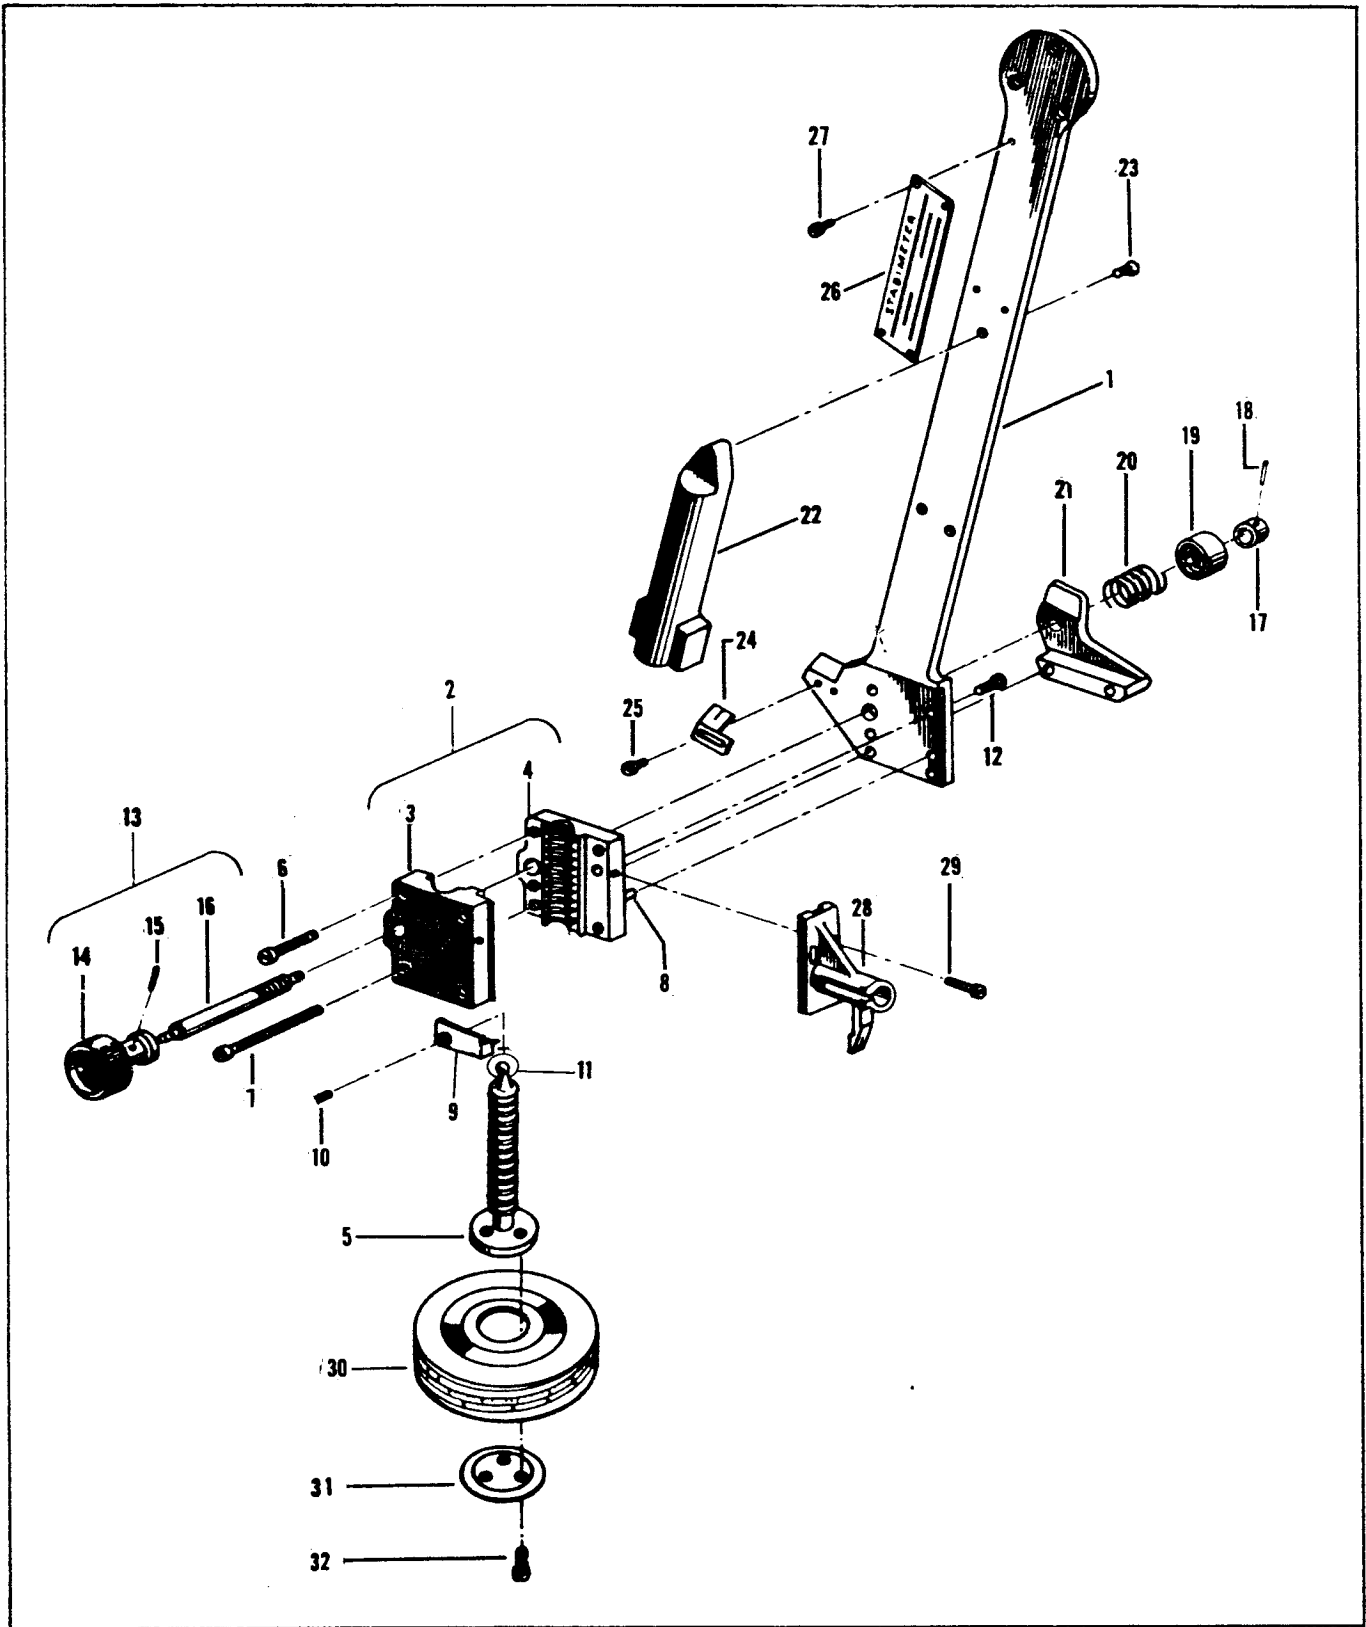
Radius Arm Assembly and Radius Arm Parts
